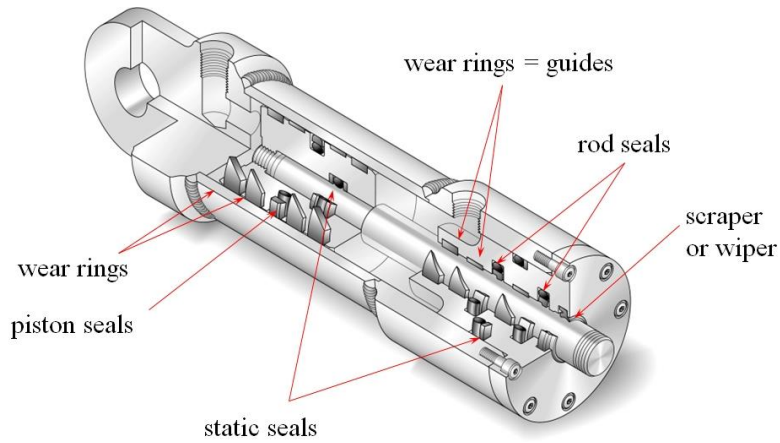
Sealing Elements in a Hydraulic Cylinder
